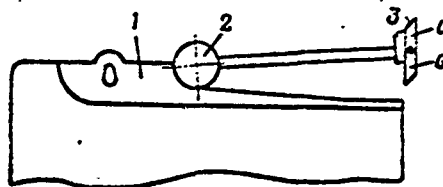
Rear sight with attachment: 1, sight blade; 2, rear sight slide; 3, attachment; a, combat position; b, travel position.
